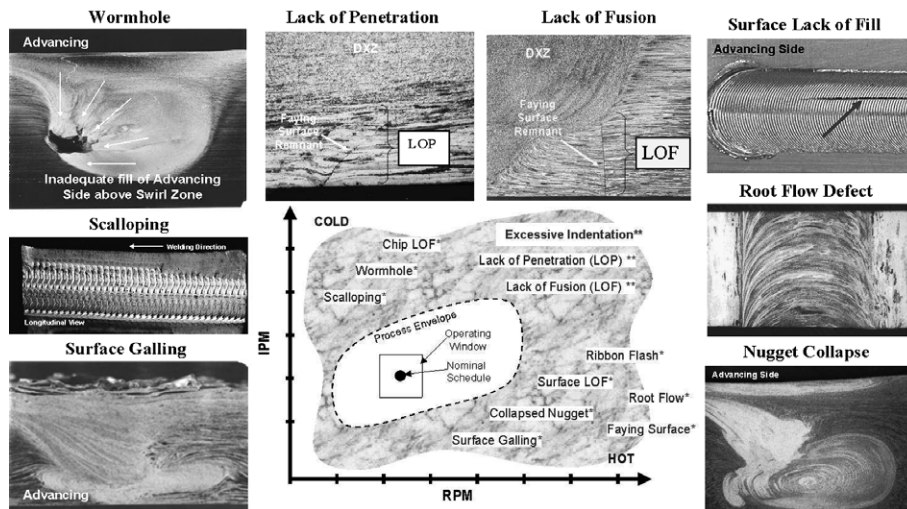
Characteristic defect types in friction stir welds [13].
